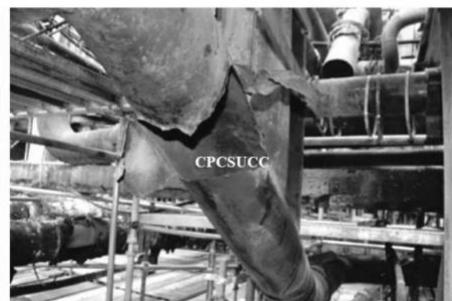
1Cr-0.5Mo boiler superheater tube in 700 psig steam service that failed due to overheating.
